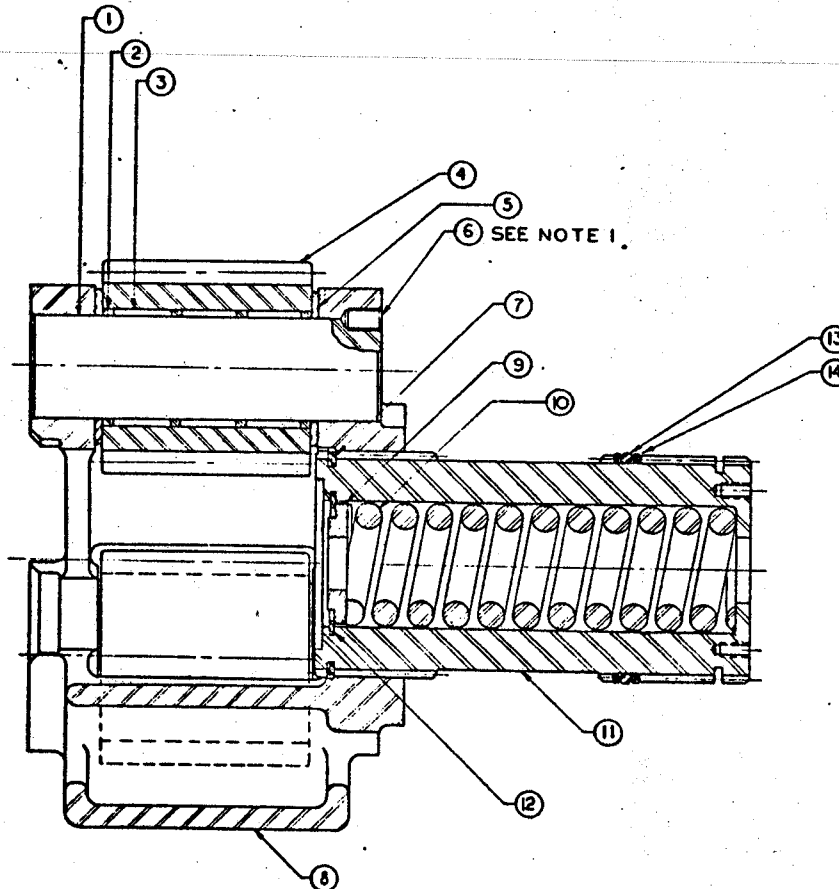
FIG. , SHIFT CONTROL ASSEMBLY, P-60 Winch, 48130
